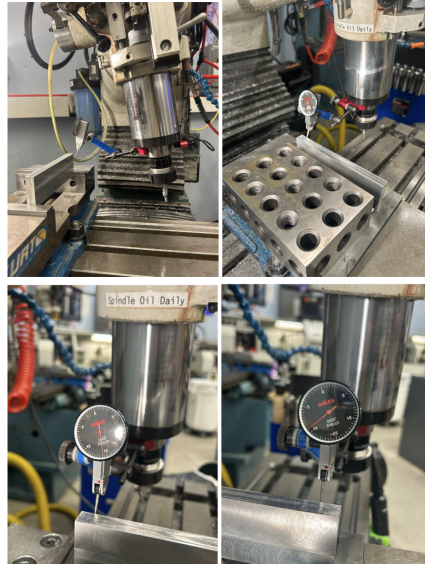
Part setup for the angled face cut. The part should be securely clamped and checked with a dial test indicator before machining.
